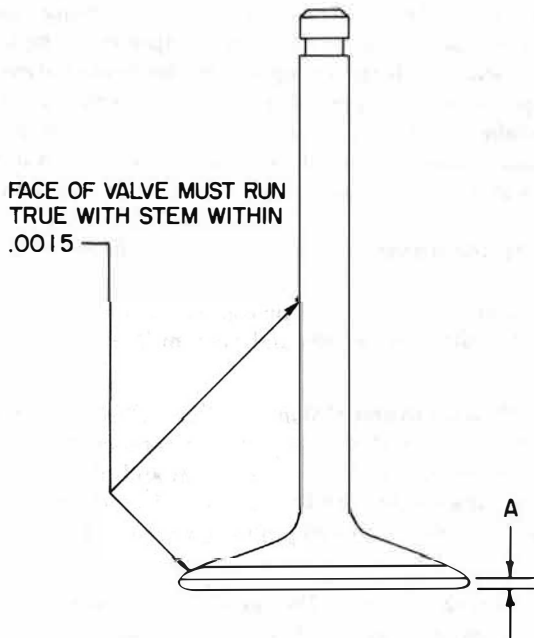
Valve Showing Locations for Checking Run-Out and Section for Measuring Edge Thickness
